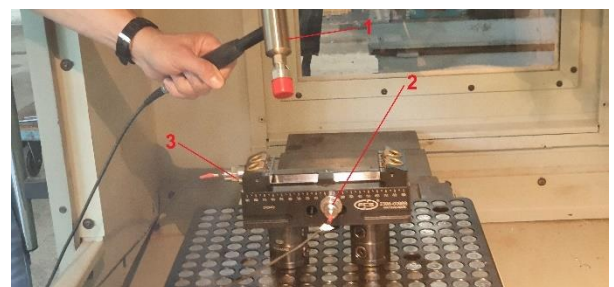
Measuring components: 1-Impact hammer, 2 -X
